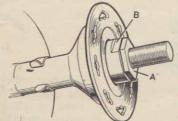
This illustration shows the front hub removed from the forks. To adjust the bearing there is no need to remove the wheel.
